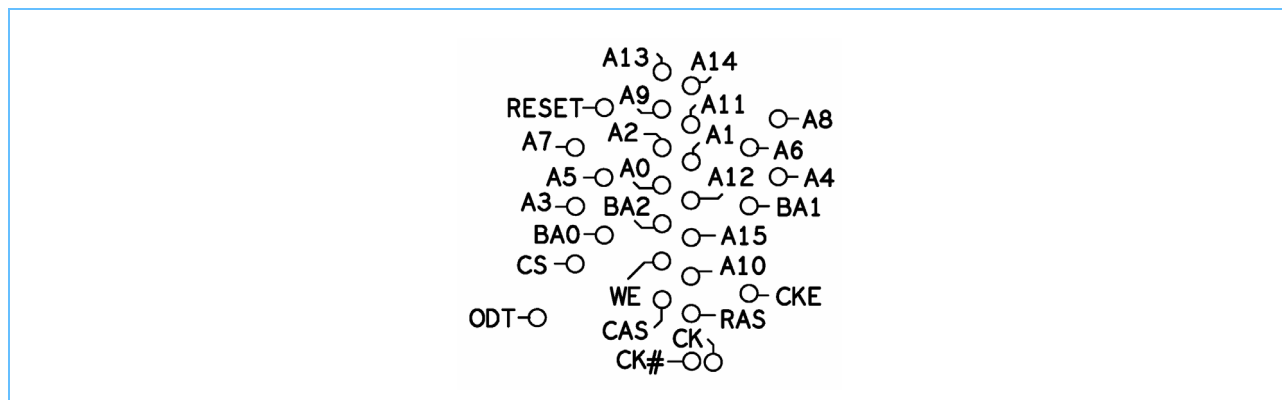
Test Point Identification (Raw Card Version D): Back Side View Test Point Area Under the DRAMs
